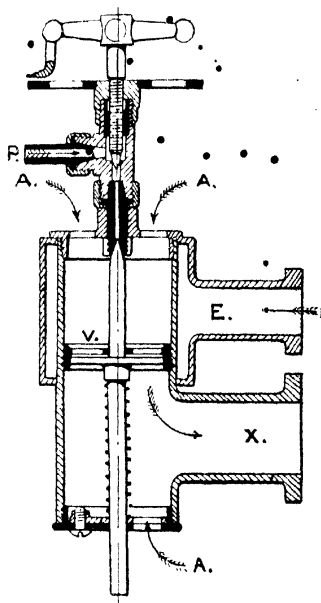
Gravity carburettor with throttle-controlled snifting feed - Endurance.
